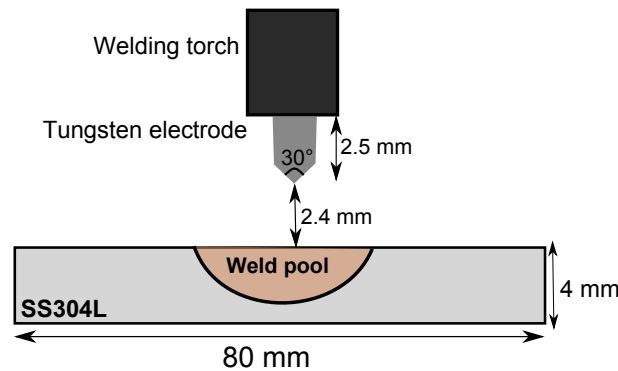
Geometric parameters for the torch and welding disc (not to scale)
